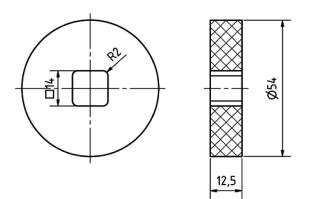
Dimension of testing sample Rys. 3. Wymiary badanej próbki
